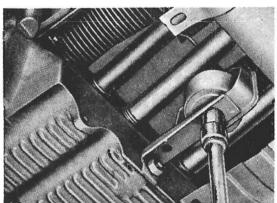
Fan belt being removed. Screwdriver is held in a notch on the back of the pulley and braced against a generator through bolt. Use a 21-mm (13/16-in.) wrench to remove the nut.
